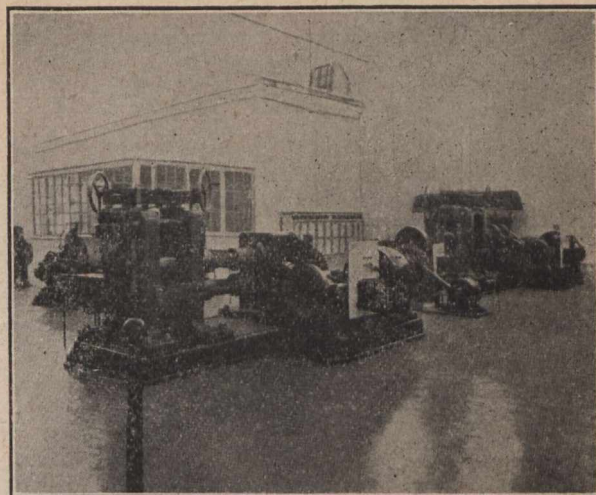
Rolling mills. Fillet-annealing furnace on right.
